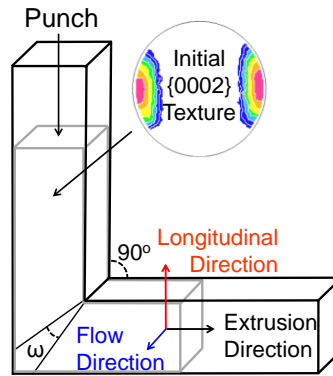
Schematic of ECAP process illustrating the workpiece passing through a sharp 90° angle with the shear zone defined by the arc ω . The {0002} texture of the starting plate material is indicated in the inlet channel to illustrate the initial crystal orientation with respect to the bar axis. The directions illustrated about the exit channel correspond with the samples tested for this study and will be referred to with abbreviations LD, FD, and ED.
